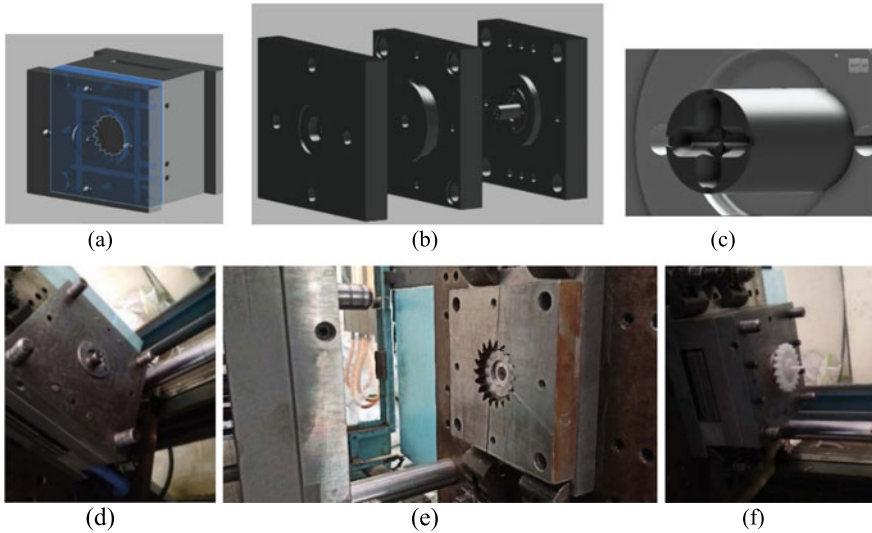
Design and development of die: a CAD model of die assembly. b CAD model of die parts. c CAD model of gate opening of die. d Asymmetric gear core. e Asymmetric gear cavity. f Produced gear on die
